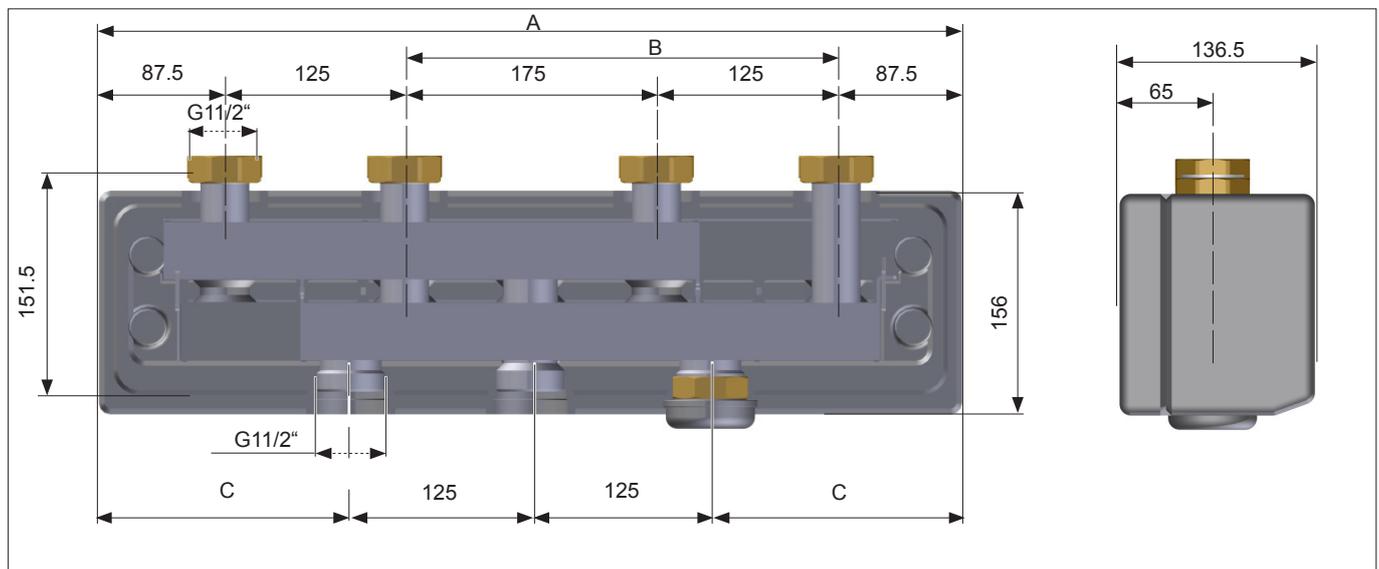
Dimensions of 2-way boiler manifold; VB32-2 [mm]
